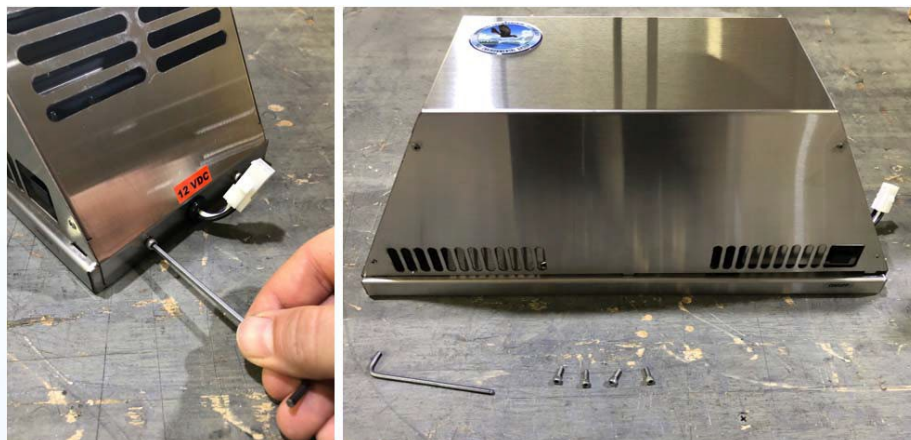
COVER SOCKET CAP SCREW REMOVAL
